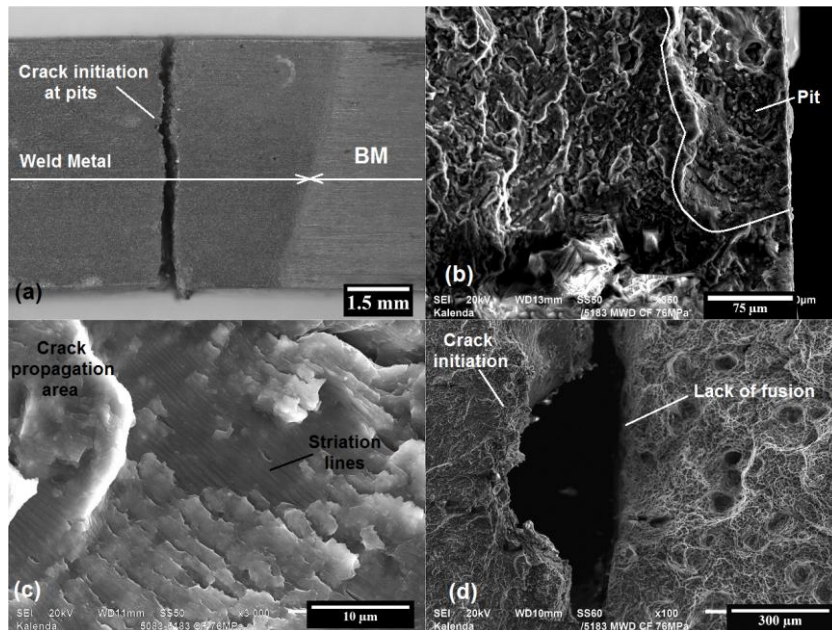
Typical features of fatigue fracture in 5083/ER5356 welds tested in 3.5% NaCl: (a) and (b) crack initiation at pits in the weld metal; (c) crack propagation in the weld metal; and (d) crack initiation at a lack-of-fusion type defect.
